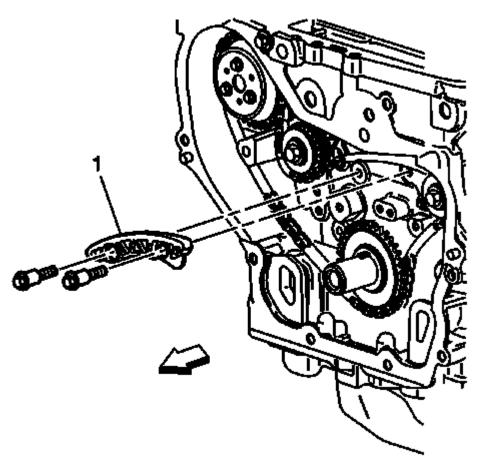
Upper Balance Shaft Drive Chain Guide Courtesy of GENERAL MOTORS COMPANY
